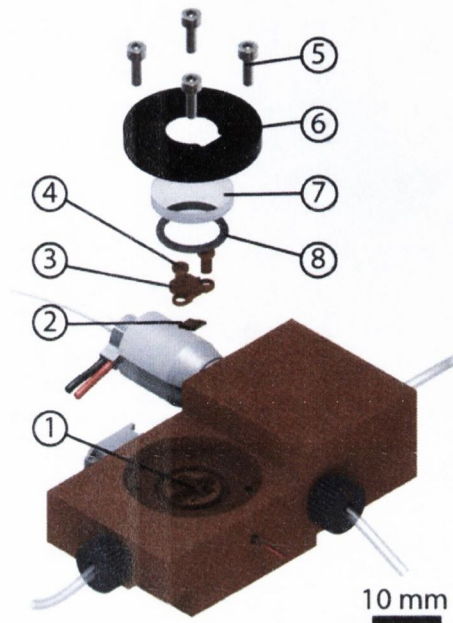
Exploded view of the measurement chamber: 1 Recessed pocket for the cantilever array and liquid cell, 2 Cantilever array, 3 Cantilever array clamp, 4 Two PEEK screws, 5 Screws to tighten the frame, 6 Anodised aluminium frame, 7 Glass cover, 8 O-ring seal.
